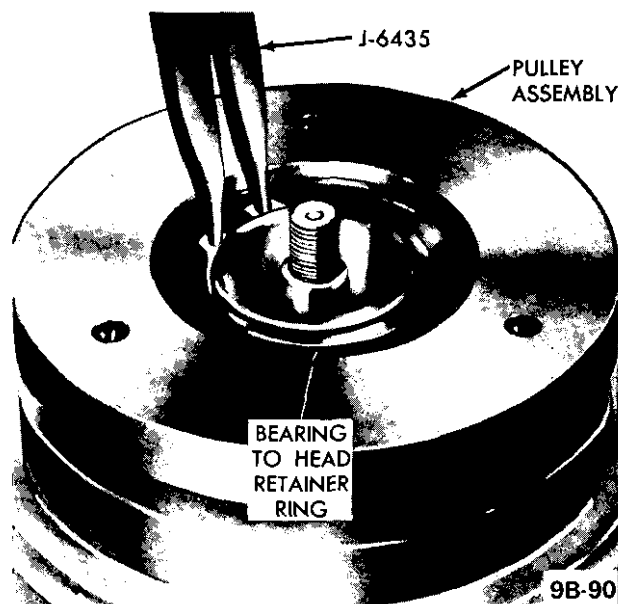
B-116 Removing or Installing Bearing to Head Retainer Ring
